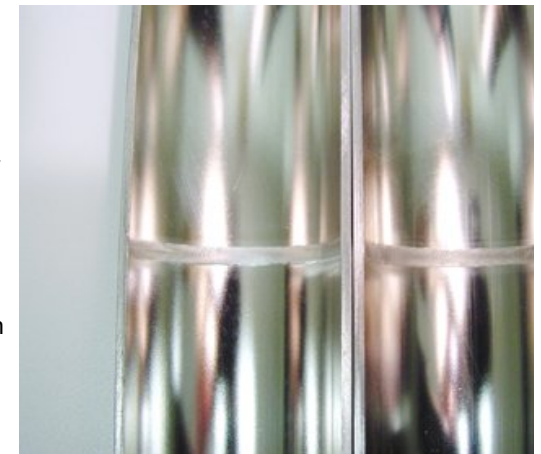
Orbital weld cut open for inspection of the ID surface. Weld coupons or test welds are routinely used for Quality Assurance of biopharmaceutical process piping systems. Photo courtesy of Protech Process, Inc. and Arc Machines, Inc.
